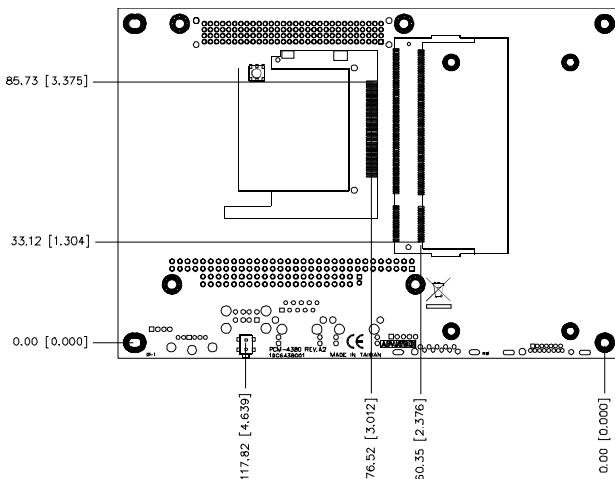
PCM-4386 Mechanical Drawing (Solder Side)
